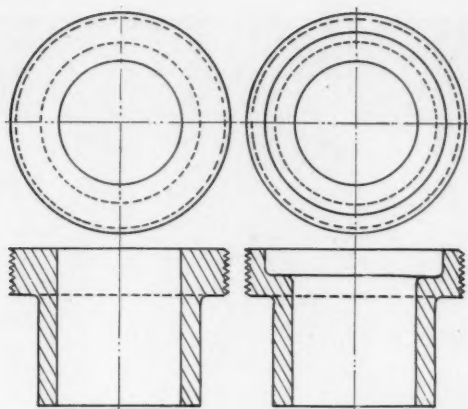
POOR (LEFT) AND GOOD DESIGN (RIGHT) OF THREADED COLLAR.
